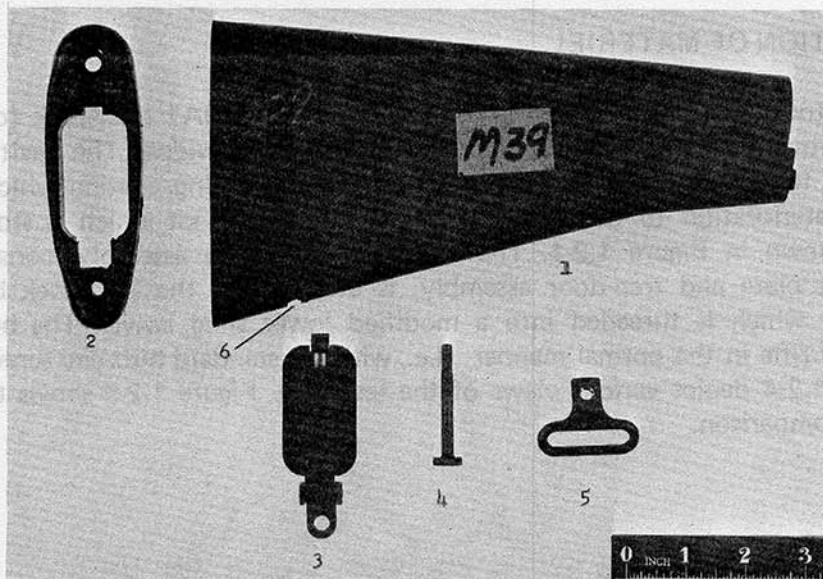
Disassembled View of Test Buttstock Major Components. 1. Plastic Stock. 2. Rubber Butt Plate. 3. Trap Door Assembly. 4. Butt Plate Retaining Screw (LOWER). 5. Rear Sling Swivel. 6. Slot for Rear Sling Swivel. (Standard Butt Plate Retaining Screw, UPPER, Not Shown).
